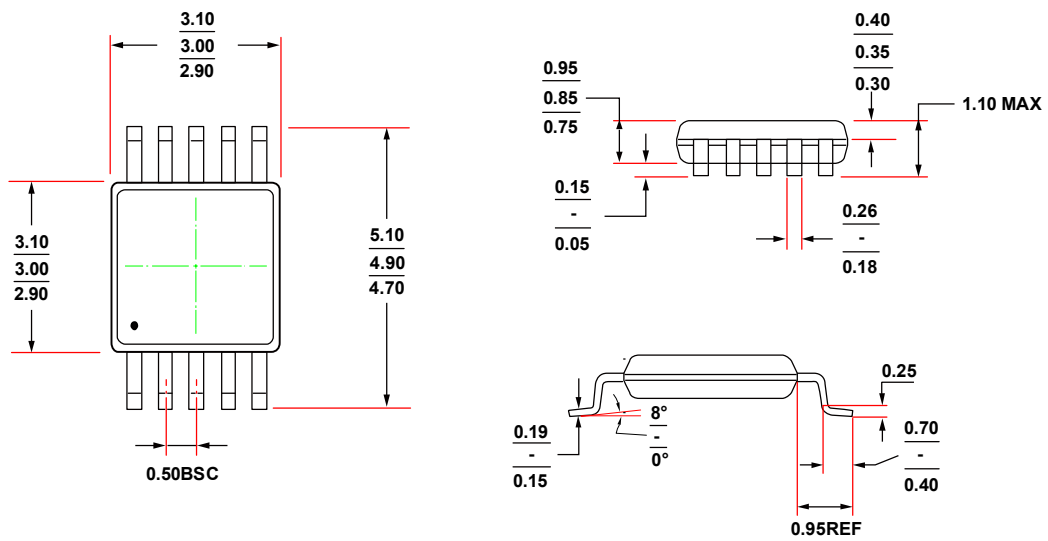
10-Lead MSOP Package Dimensions shown in millimeter
